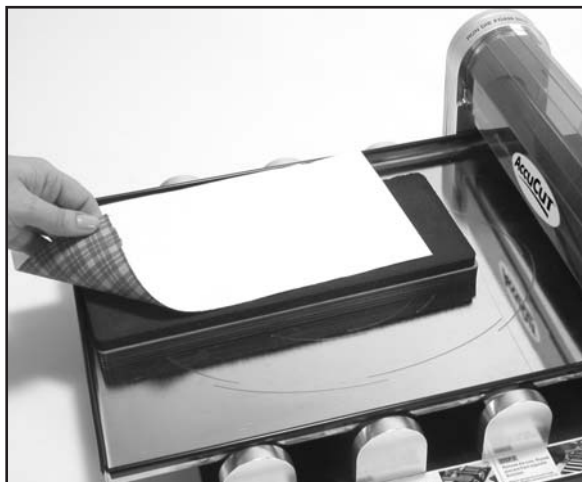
You will be able to cut more shapes from a sheet of paper if you place paper so it just covers design, not entire surface of die.
